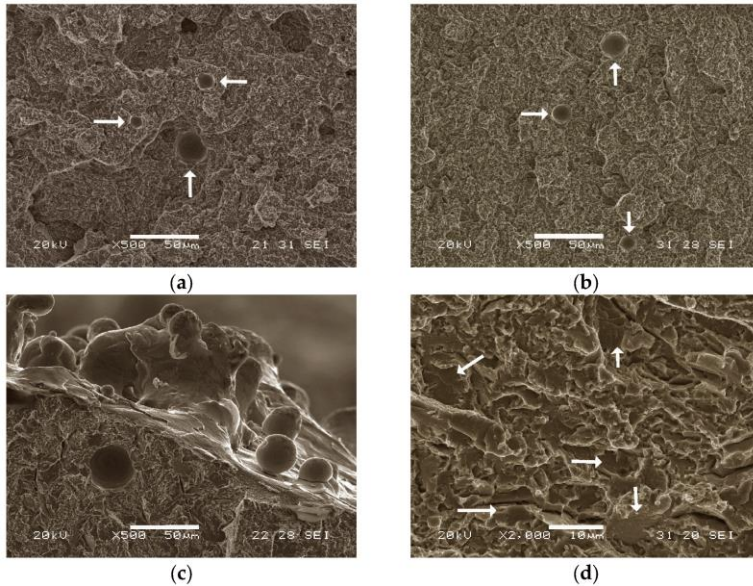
Representative fracture facies of broken tensile specimens: (a,b) austenitised, unaged specimen; (c,d) non-austenitised specimen aged at 540 °C.
